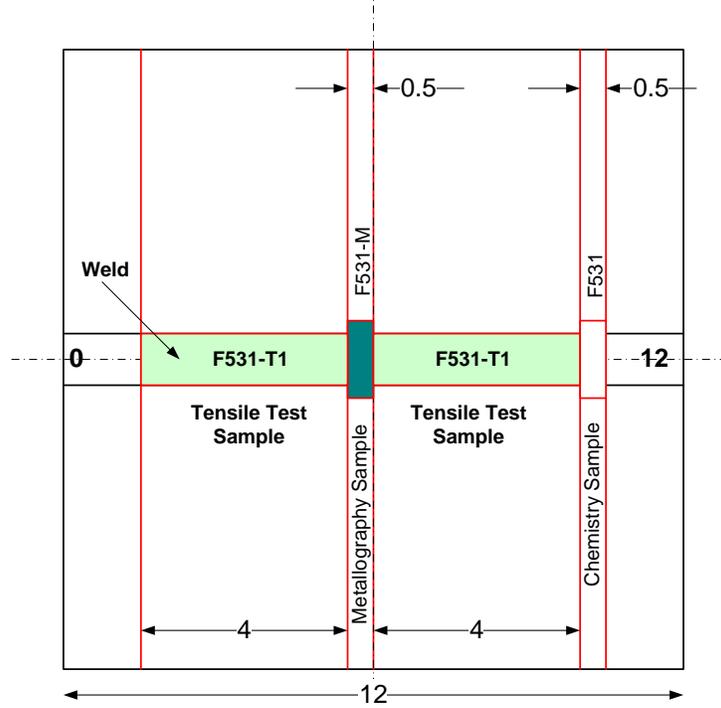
Schematic of Sample Extraction from the SMAW Test Assemblies (the weld is located along the central line 0 - 12)
